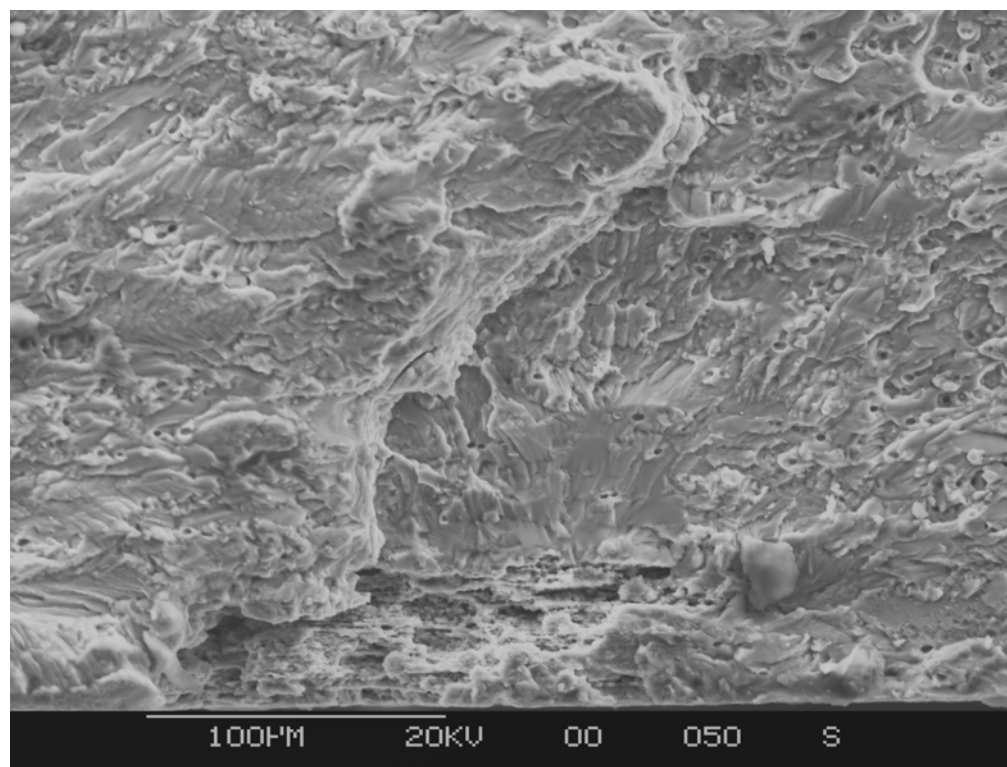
Crack Origin C (Fig. B-91) on Specimen 5967.
